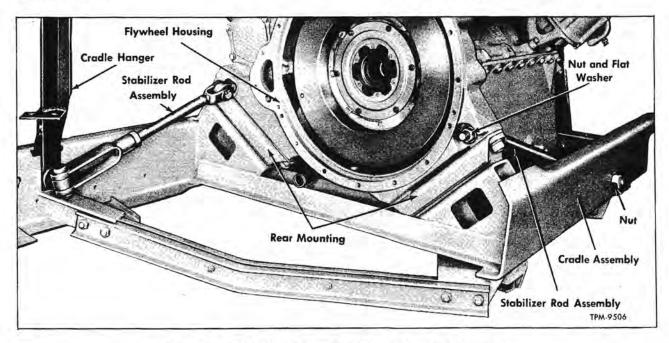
Engine Mounting and Stabilizer Rods—6 Cylinder Shown
